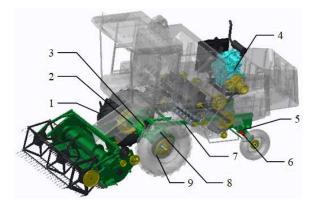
Basic structure of wheeled combine chassis: 1 = driving wheel, 2 = front axle, 3 = brake, 4 = engine, 5 = rear axle, 6 = steering system, 7 = combine frame, 8 = gearbox, and 9 = wheel reductor.
